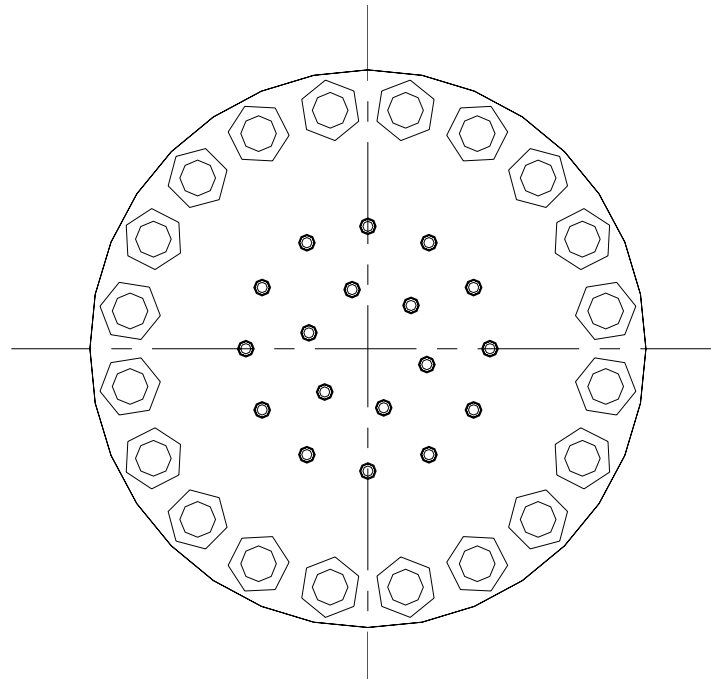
Injector Chamber Forward Closeout Flange (Drawing 7R110740)
